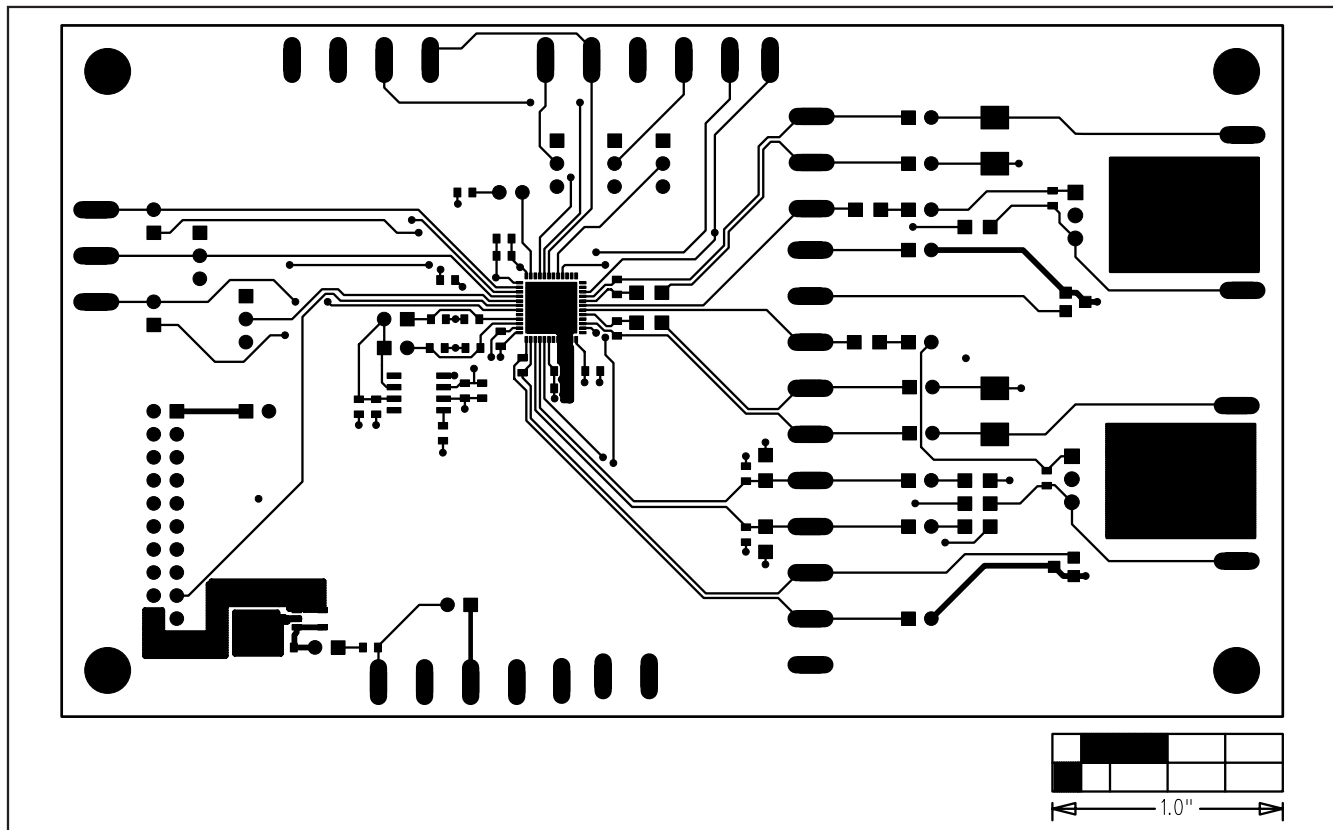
MAX1385 EV Kit PCB Layout—Component Side
